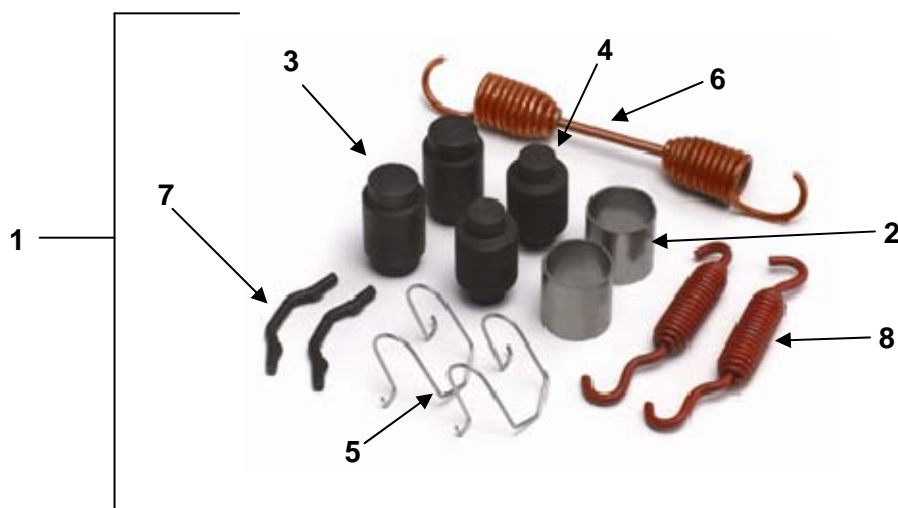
CAMSHAFT REPAIR KIT (PER BRAKE)
